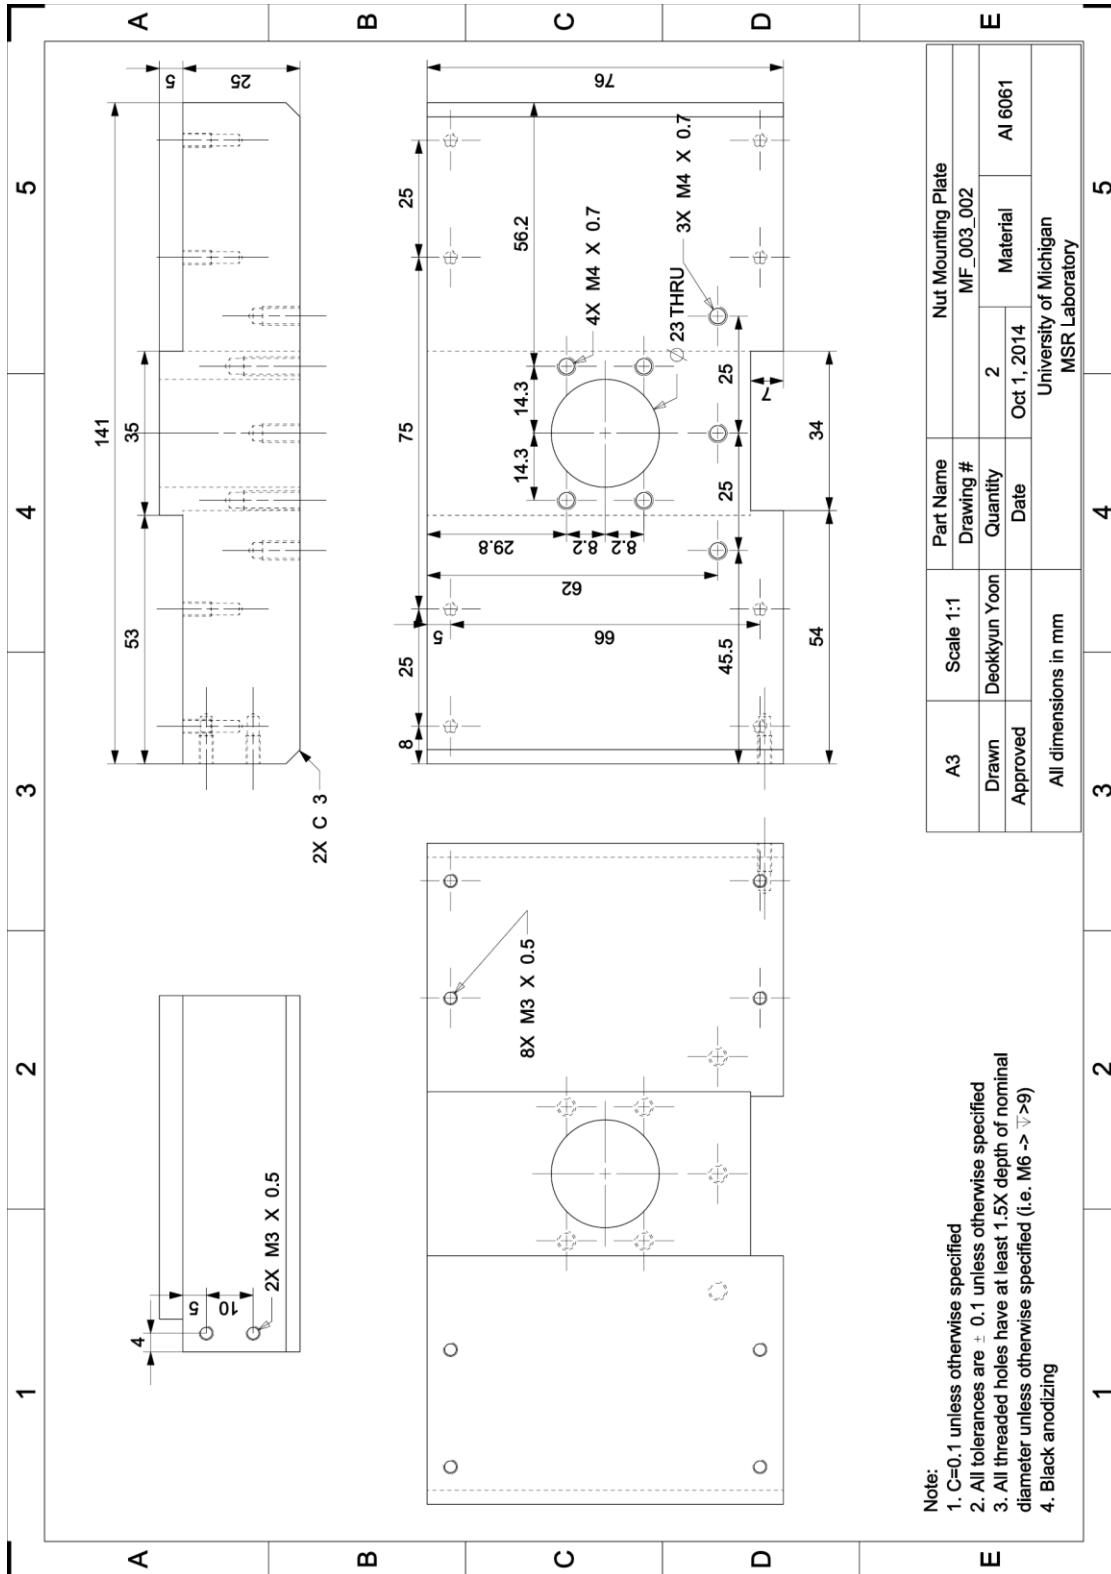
Manufacturing drawing of Nut Mounting Plate.
